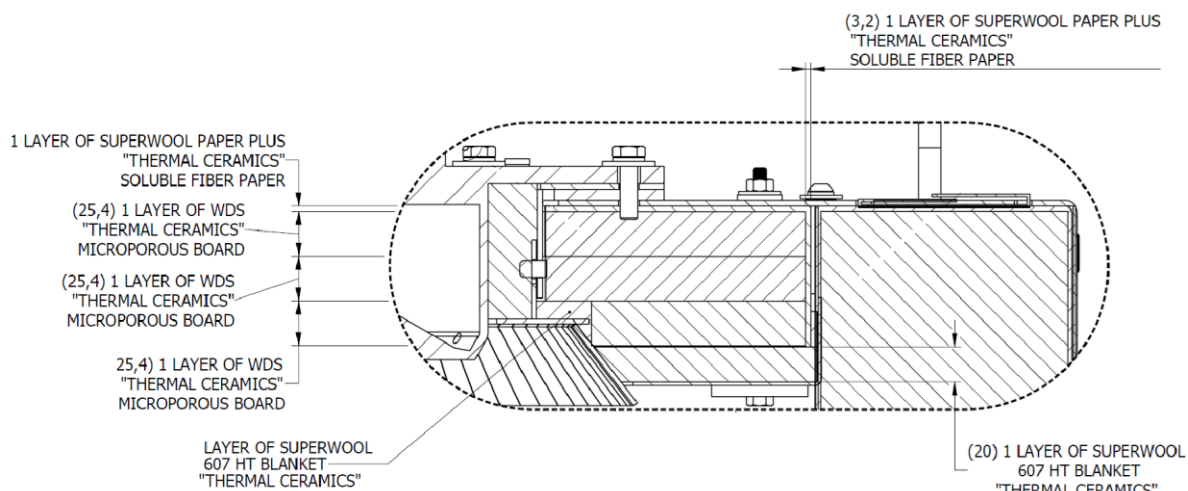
Lid insulation layers (see drawing A00-24121-MC-3100)
